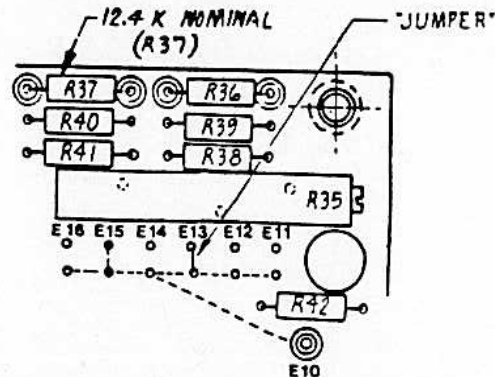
Location of Frequency Correction Compensation Jumper on Synthesizer Board Assembly.
